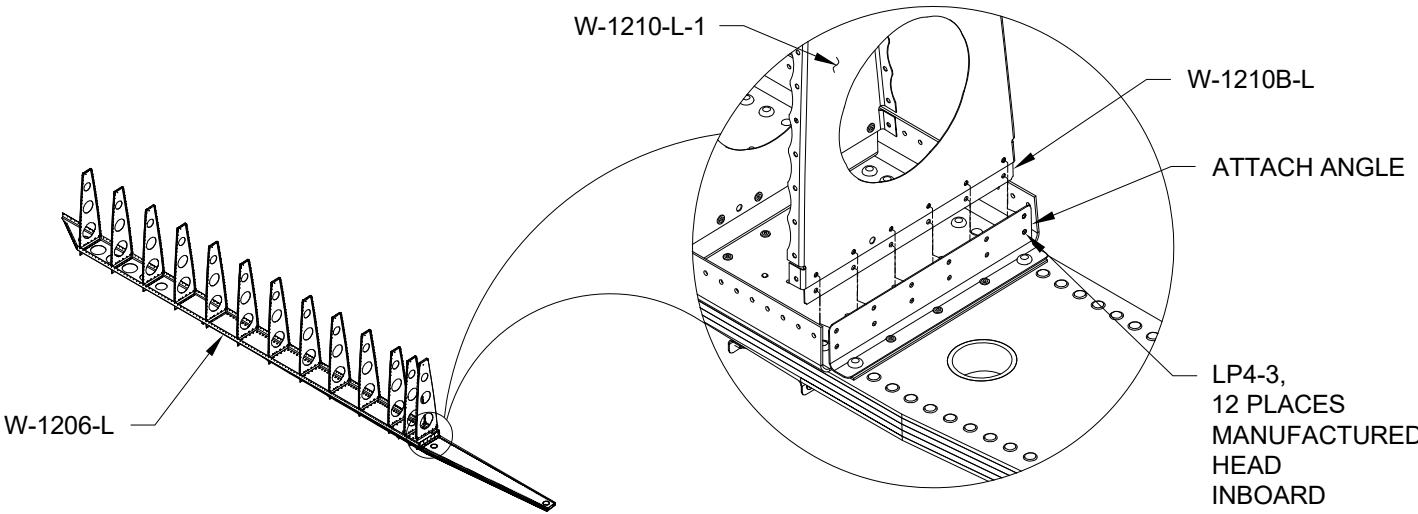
ATTACHING THE MAIN RIB AND DOUBLER
